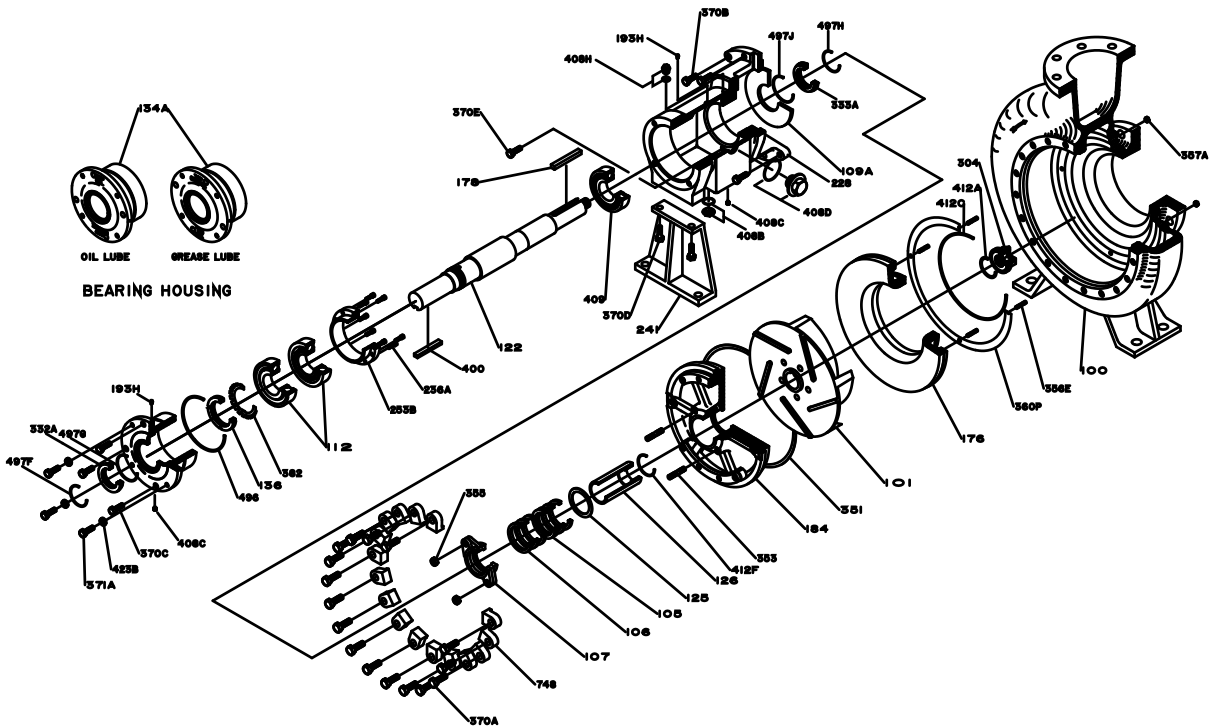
Exploded view of 3180 and 3185 S, M, L, and XL groups
